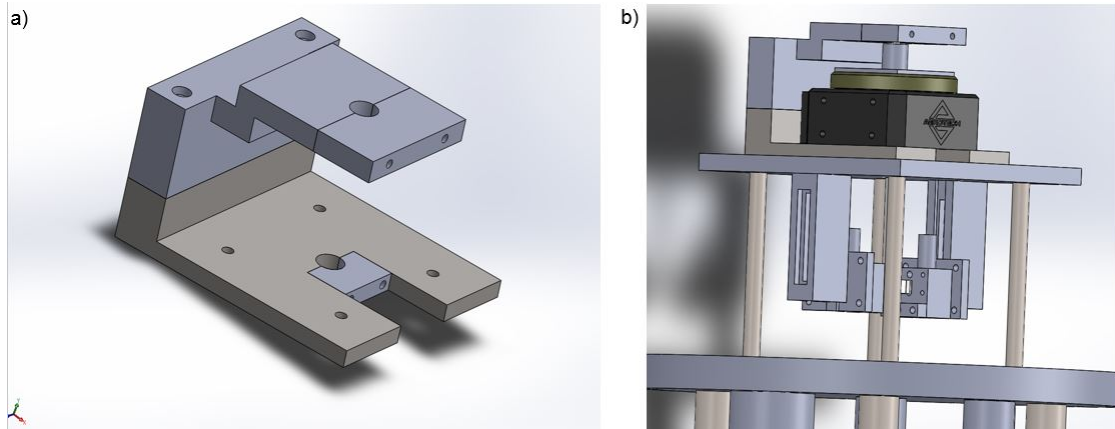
a) Shows the modified clamp with the new bearing caps. The purpose is to allow an easy way to insert the motor assembly and hold on the the bearings. b) Shows a zoomed in model of the complete large motor assembly.
